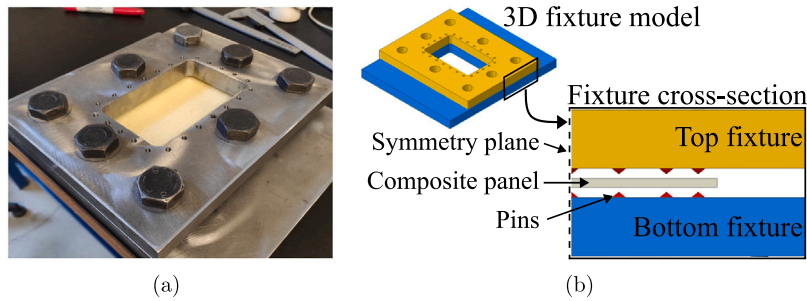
(a) Experimental fixture, and (b) 3D model showing a cross-section view of the assembly.
